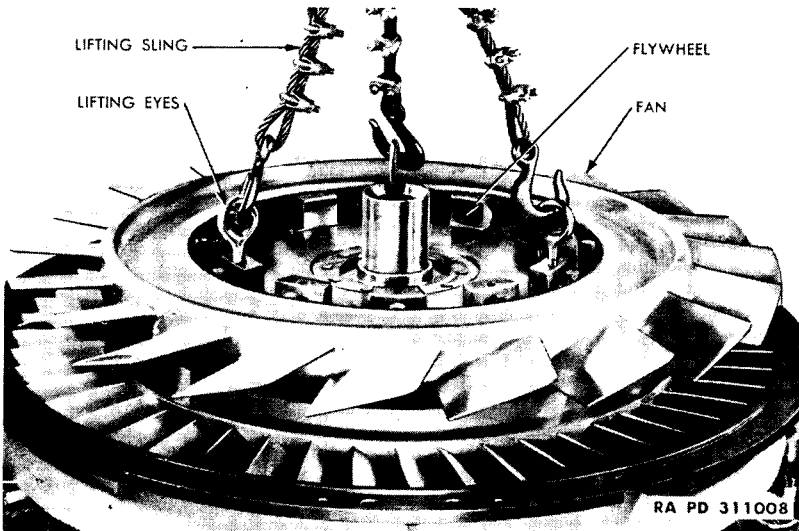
Removing Fan and Flywheel, Using Sling 5A2228 and Eyes 5A2318
